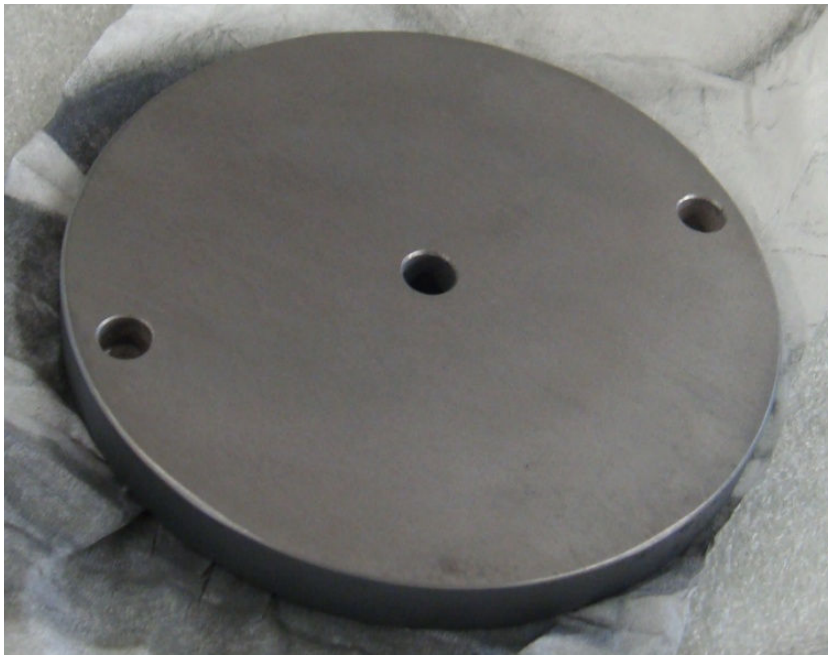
Bottom of the disc sample showing the thru and blind holes.
